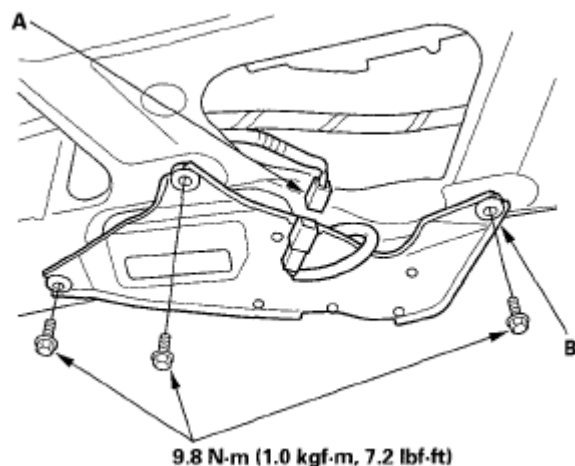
Identifying Rear Window Wiper Motor With Torque Specification
